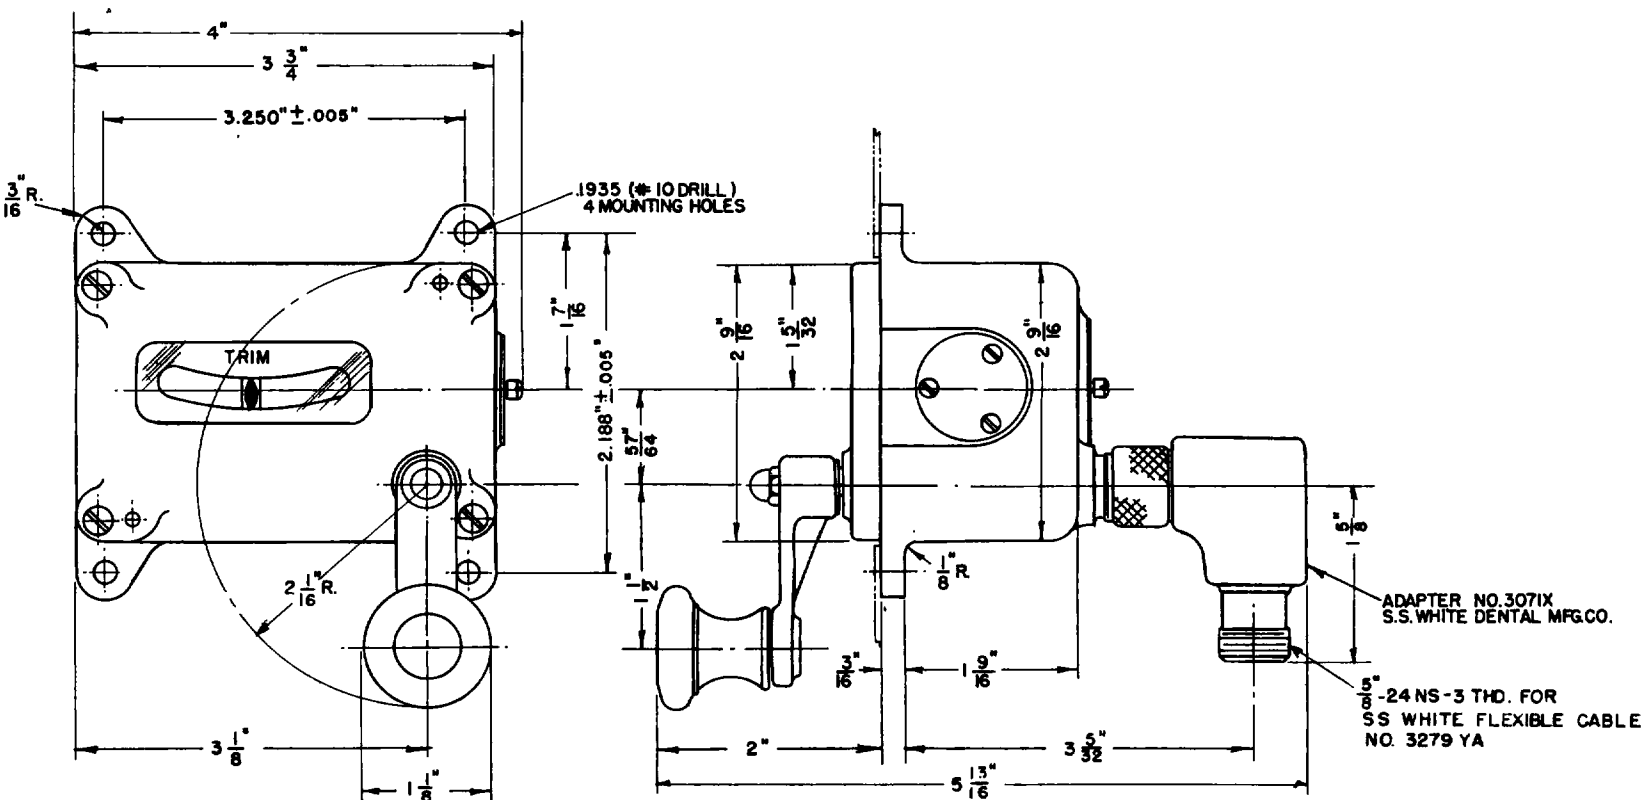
Control Box C-226/APS-10—Installation Drawing
